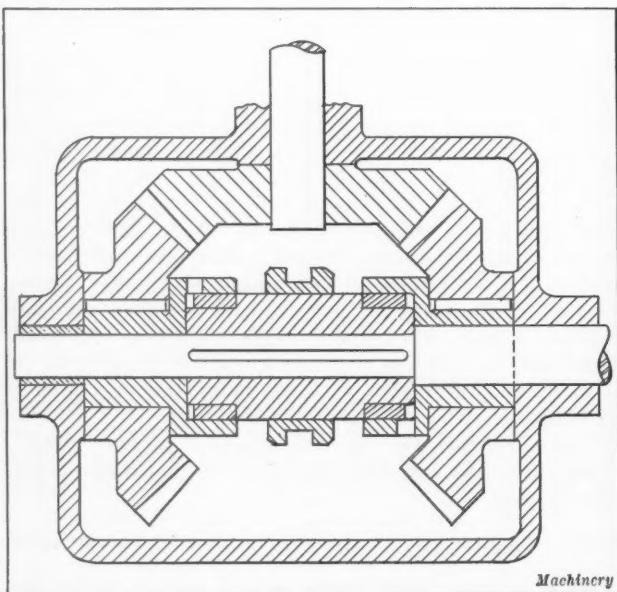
Double Friction Clutch mounted between Two Bevel Gears for reversing the Drive
